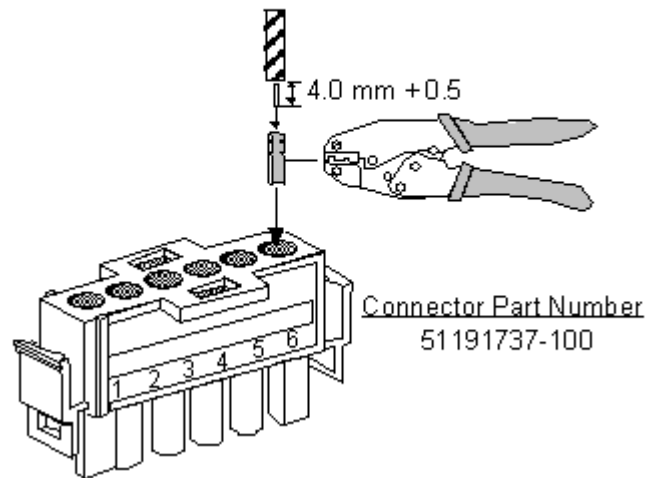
Crimp-pin type Galvanic Isolation Module terminal connector
